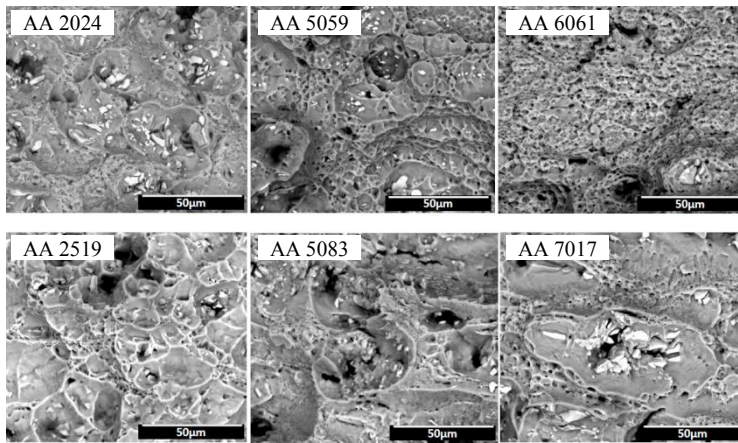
Fractographs of Charpy impact fracture surfaces of different aluminium alloy plates.
